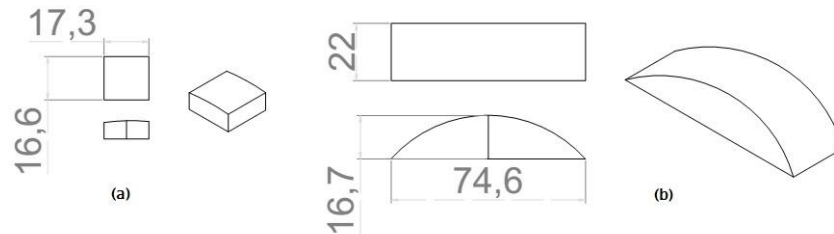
Schematics of the samples size and geometry. (a) for the Scratch test, (b) for the abrasive wear tests.
